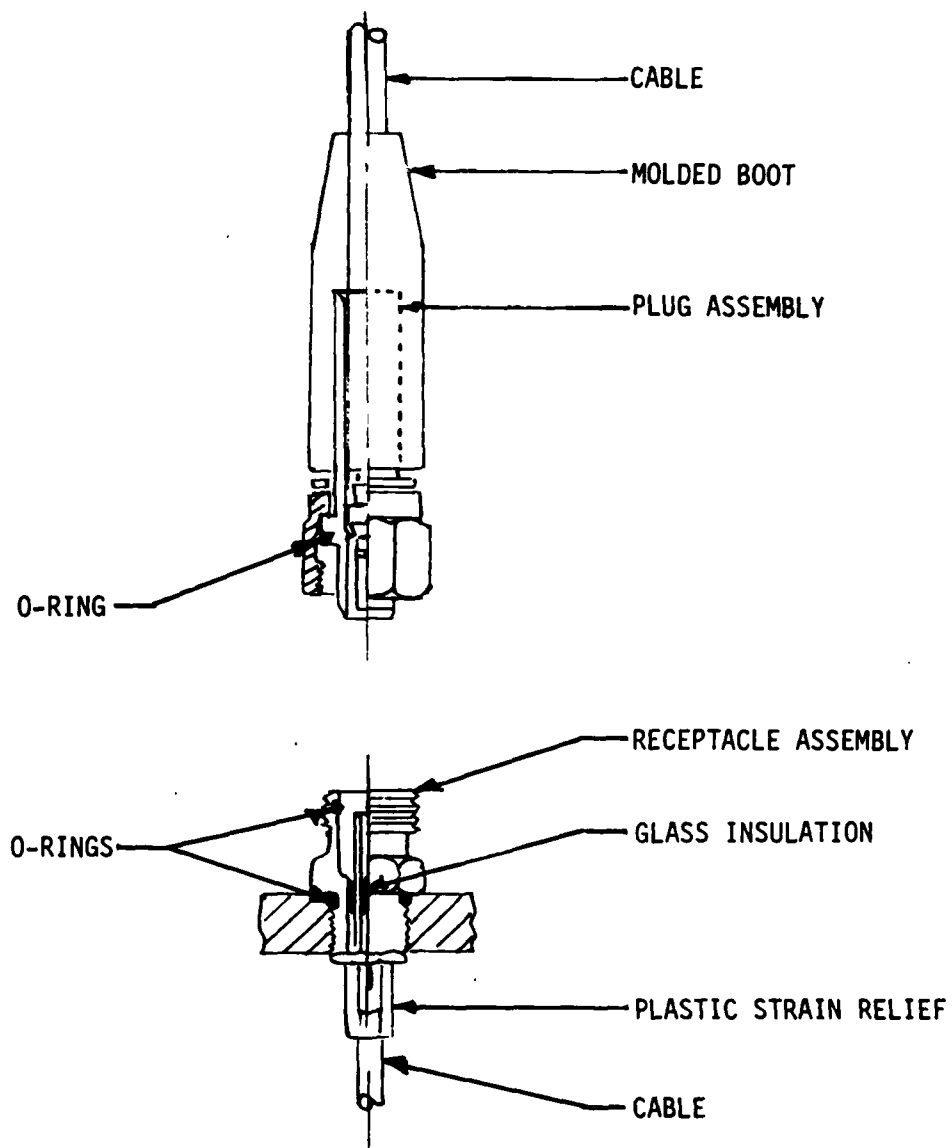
D.G. O'BRIEN, INC., 110 SERIES COAXIAL CONNECTOR
